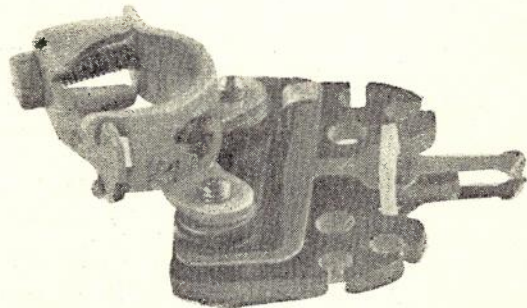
New Design of Wiper Applied to 2000 Type Wiper Assembly.
